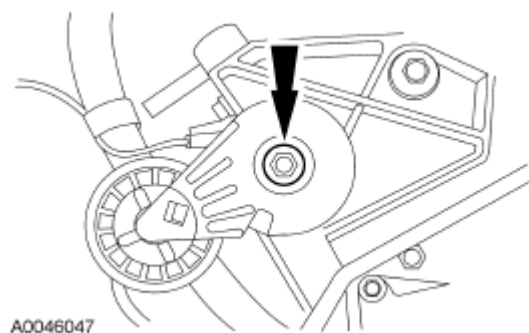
Locating Accessory Drive Belt Tensioner Bolt
